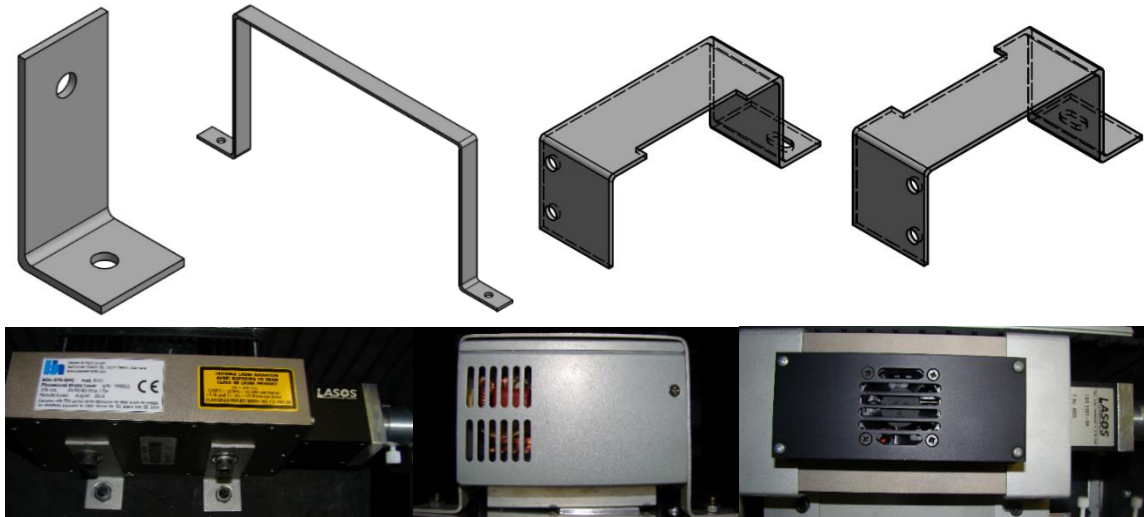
Fixation parts (aluminum angles and custom channels) for lasers, and power supply were designed to easy machining and low weight.
